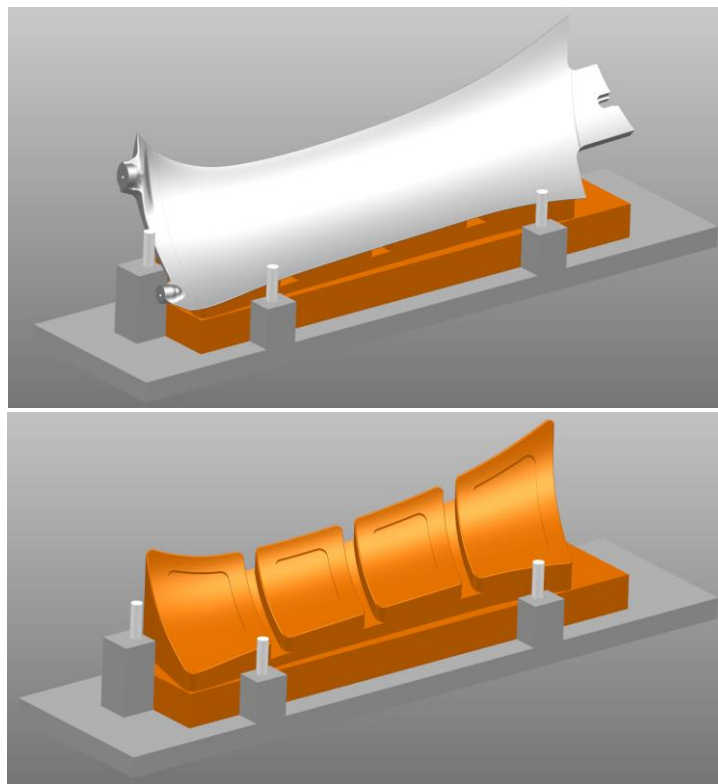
An image of the OGV vacuum fixture with (above) and without (below) the part loaded.
